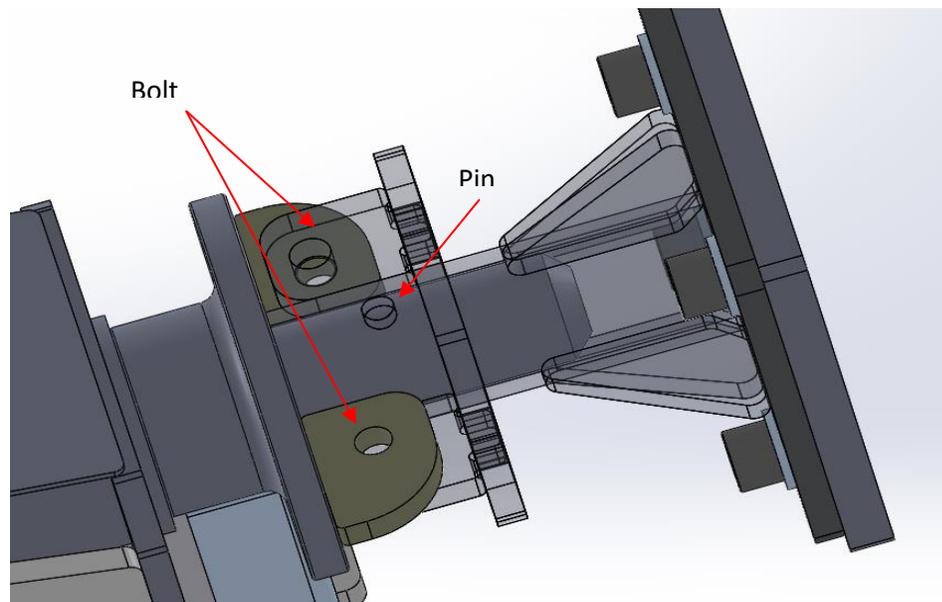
Welding Fixture Yoke Coupling with the A-Stand Shaft
